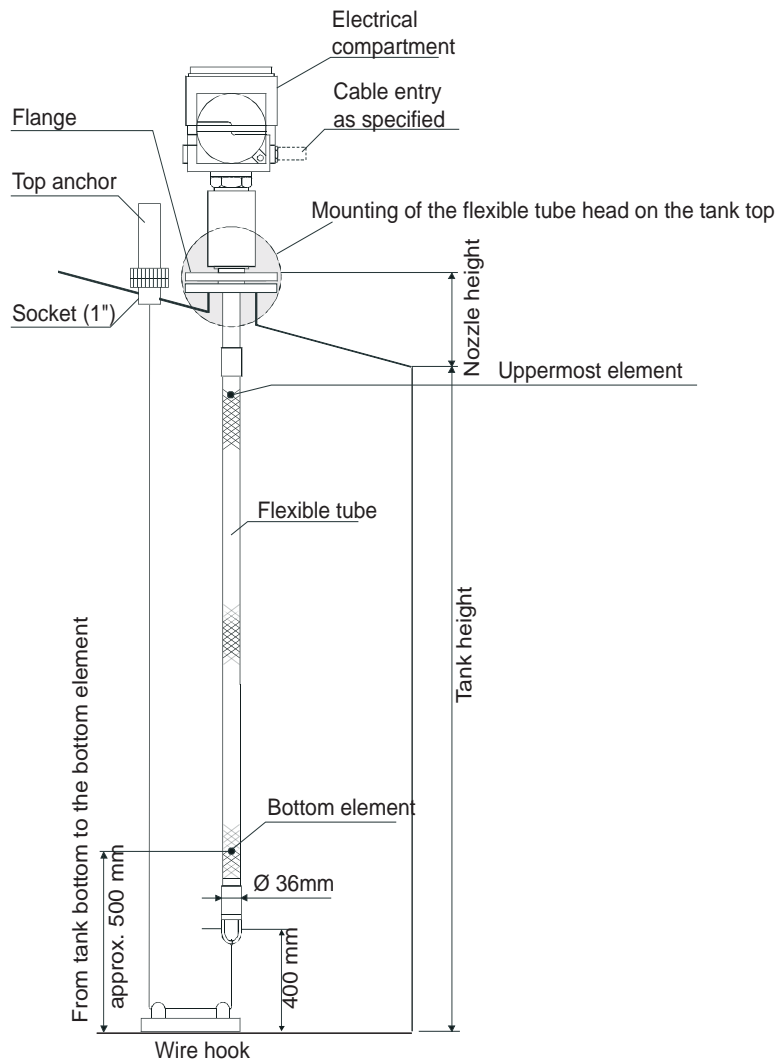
Mounting on a fixed roof tank by the top anchor method
